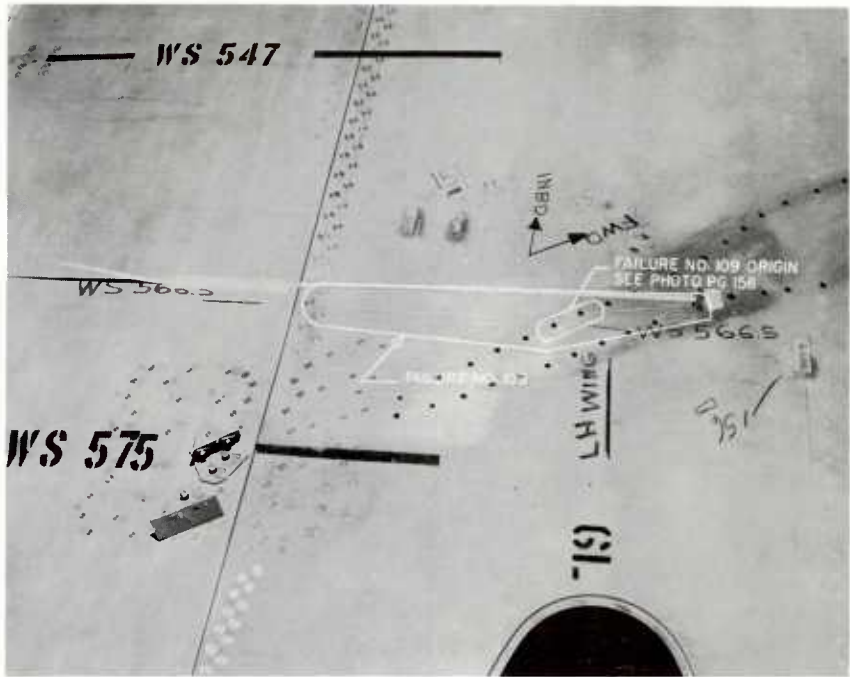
Fatigue failure in wing panel—crack through holes (see fig. 3).
